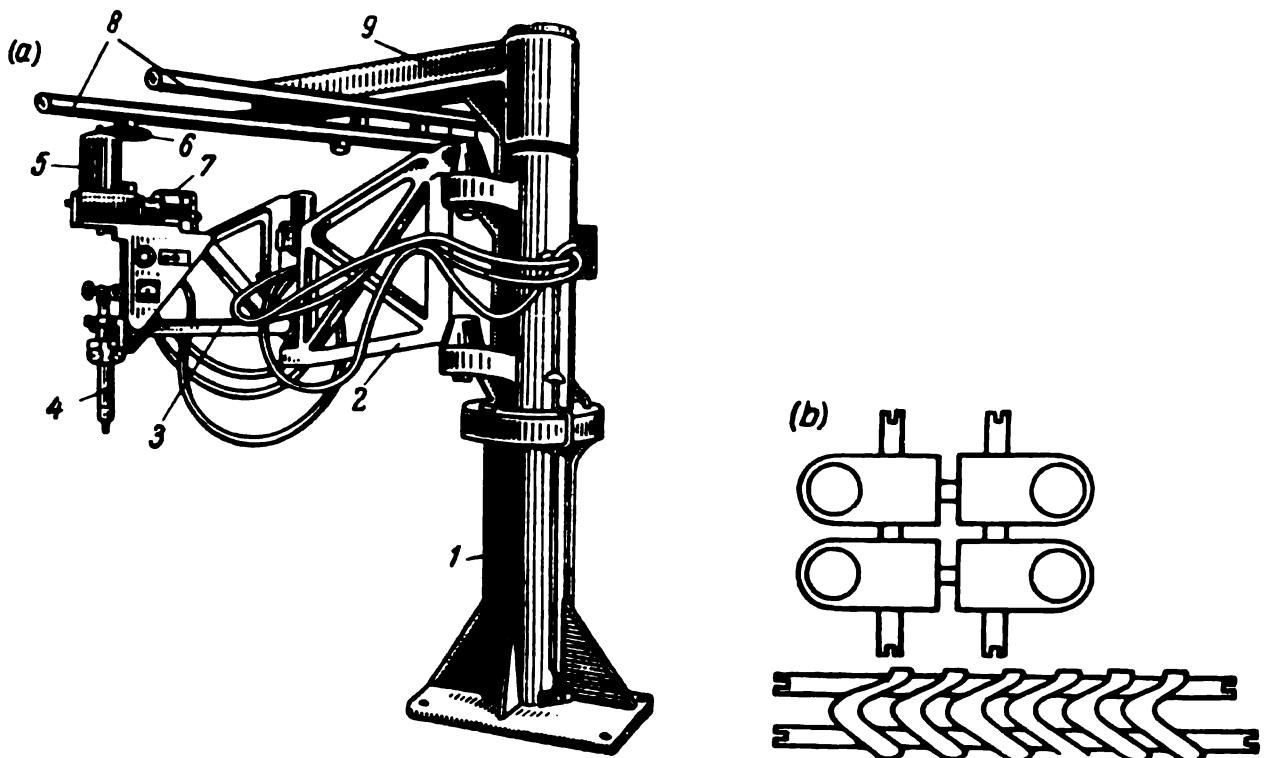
Precision oxygen shape-cutting machine, model ACIII-2:
